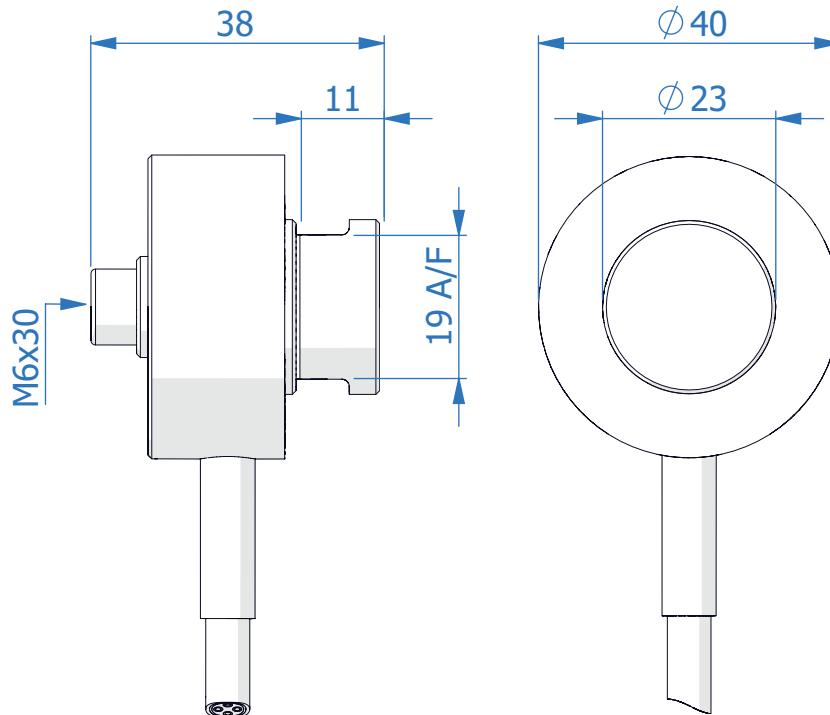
Chemically Bonded Adapter Dimensions (mm)
